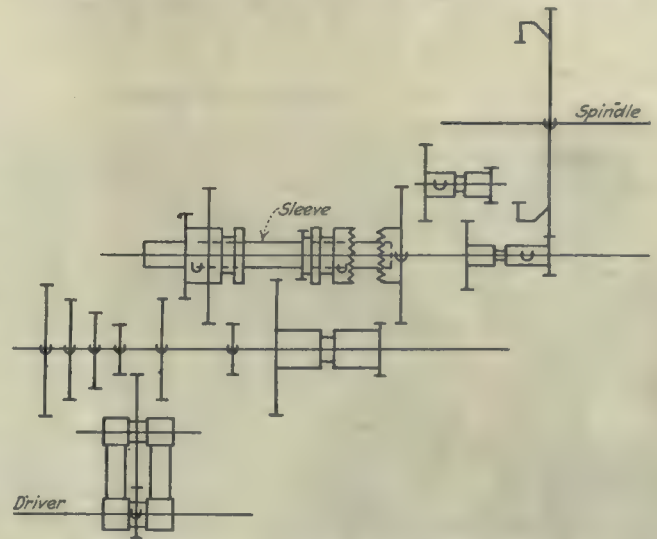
INTRODUCTION OF INTERNAL GEARING
